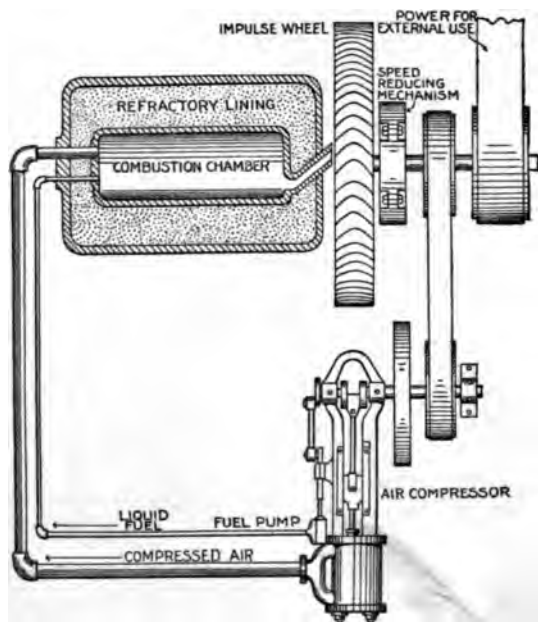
Scheme of gas turbine with reciprocating compressor.
